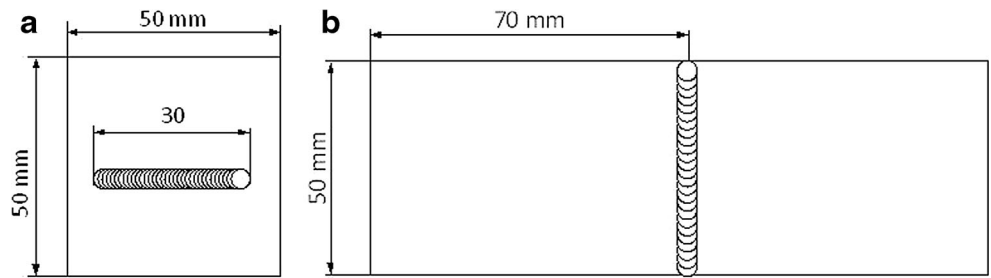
Weld joint configuration a bead on plate b butt joint
